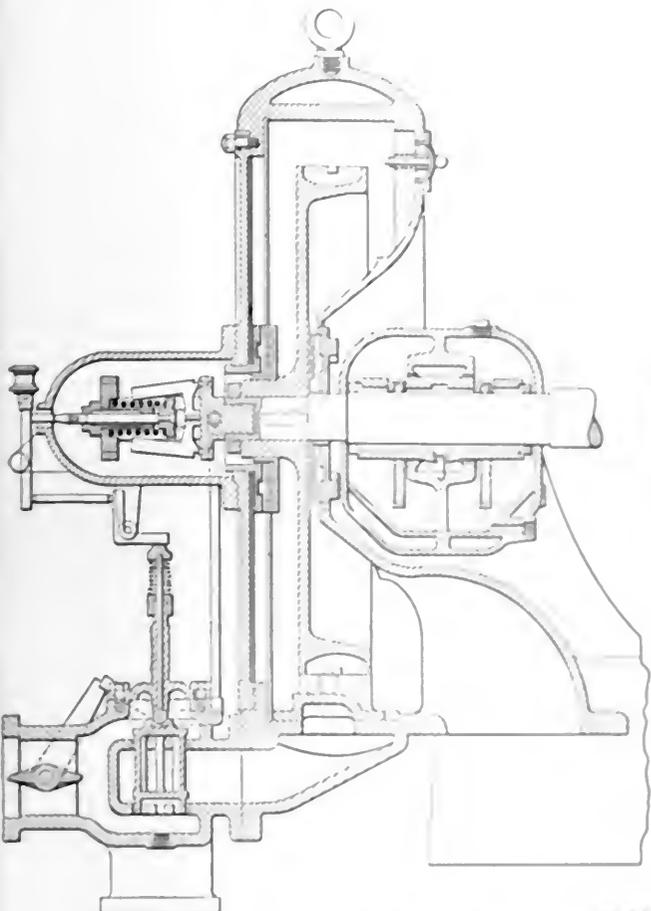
SECTIONAL VIEW OF BLISS TURBINE.
